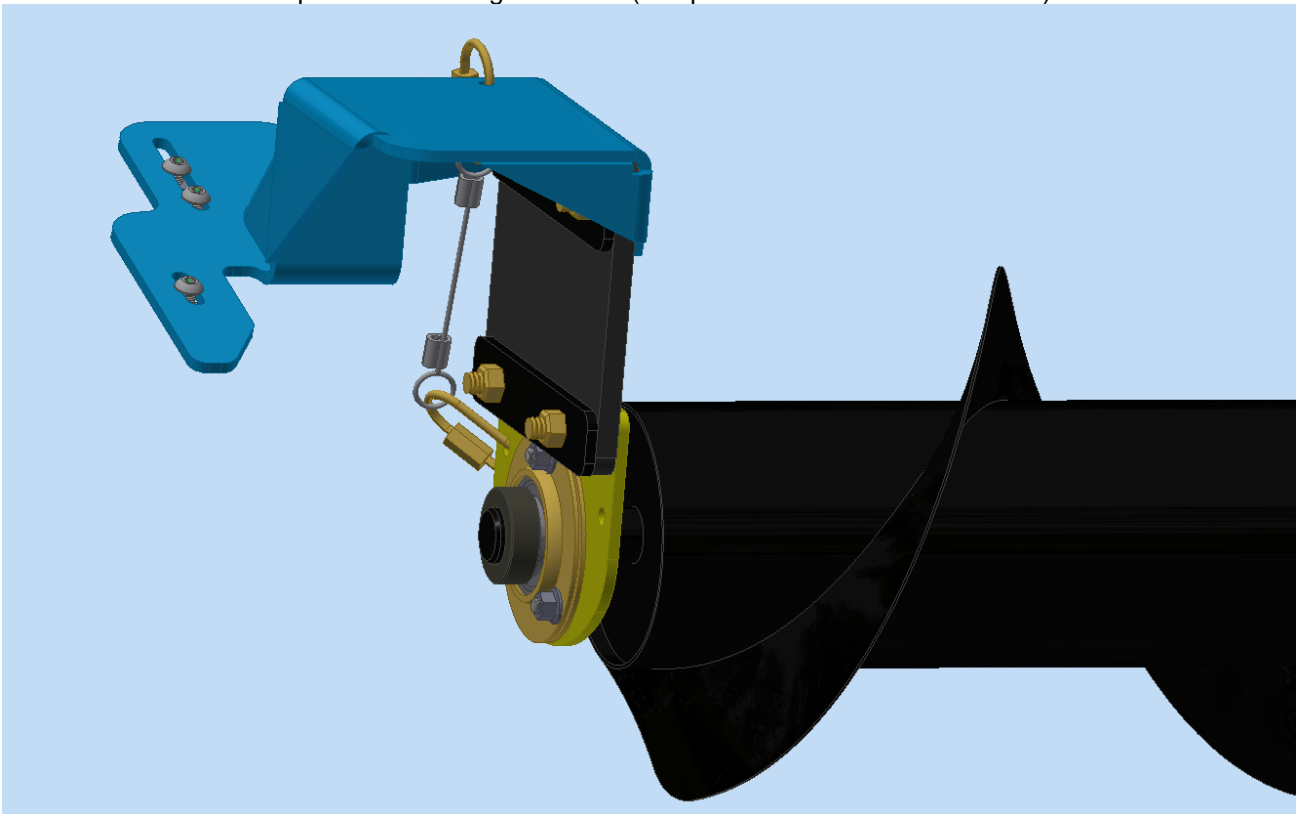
RH AUGER OUTER END VIEW WITH LOCK COLLAR FLUSH TO END OF SHAFT
